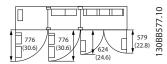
Space in front of IP21/IP54 enclosure type, frame size F13
